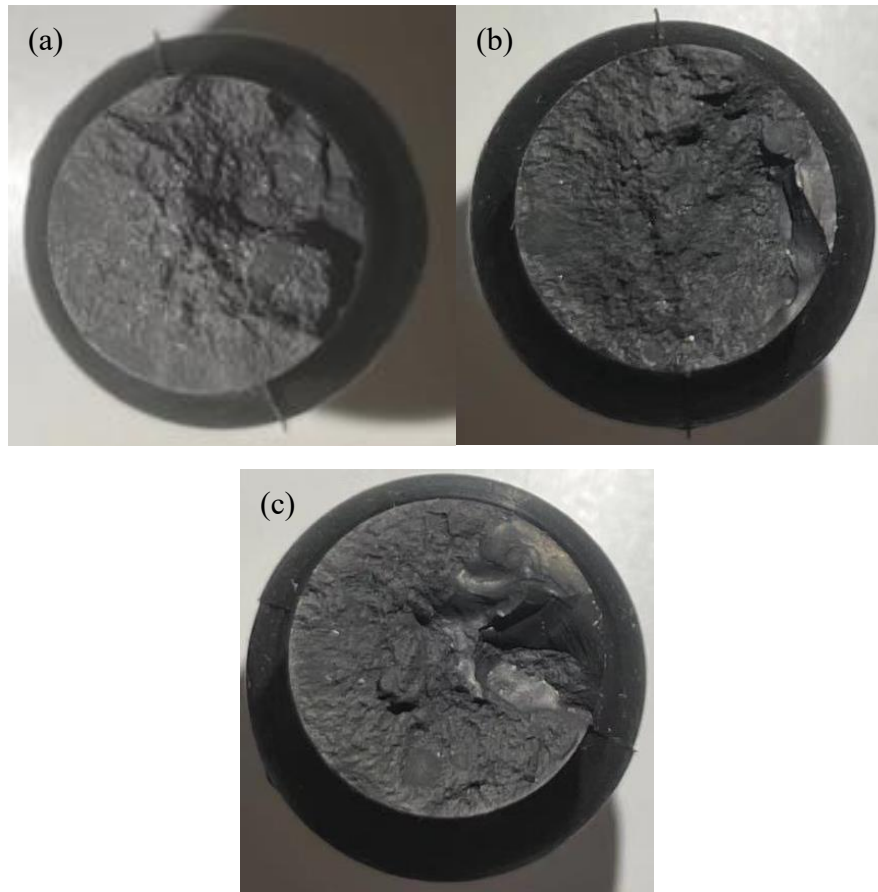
Fracture surface of (a) unaged sample and samples aged for (b) 70h and (c) 166h.
